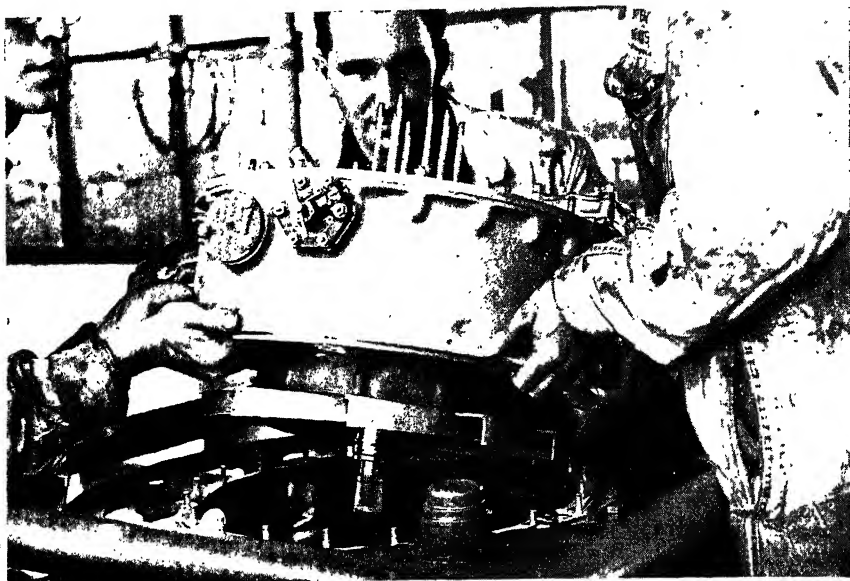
ASSEMBLY OF REAR SUPERCHARGER HOUSING TO FRONT HOUSING AND CRANKCASE
